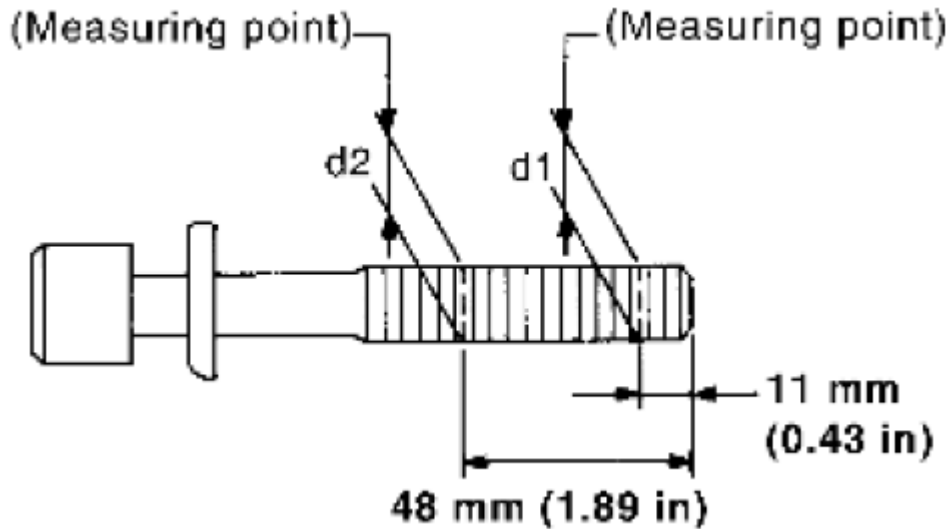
Identifying Cylinder Head Bolts Outer Diameter
